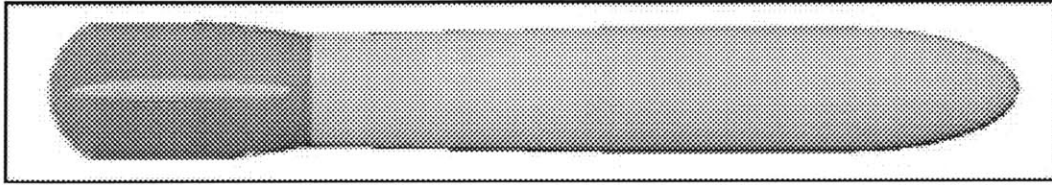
Solidworks CAD drawing of the assembled sea snake model. Six pieces fit together to form the final snake model used for casting the snake in a two step casting process.
